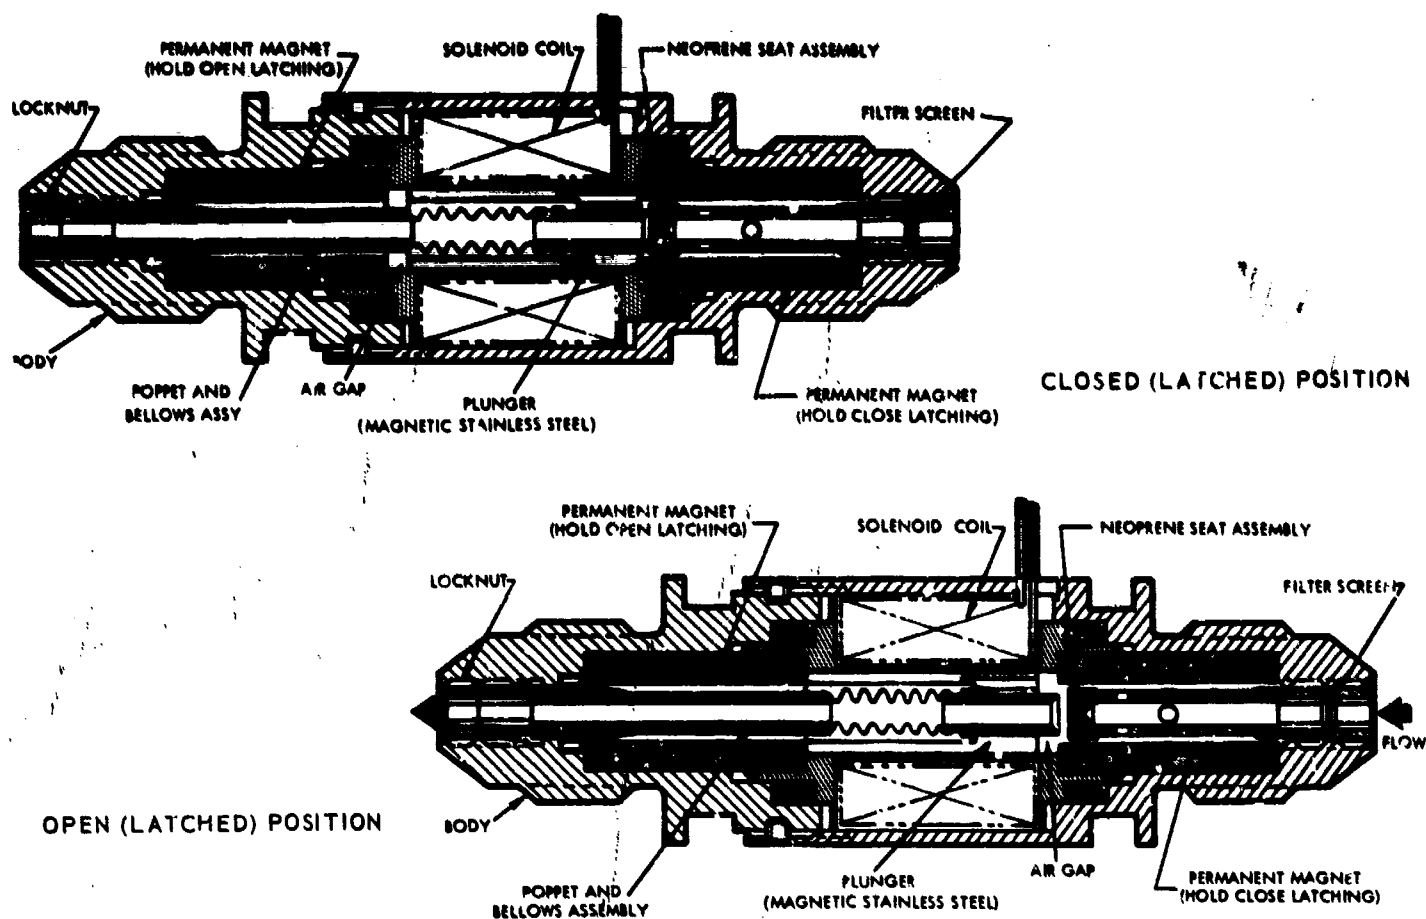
Single Coil, Dual Magnet, Magnetic Latching Solenoid Valve
